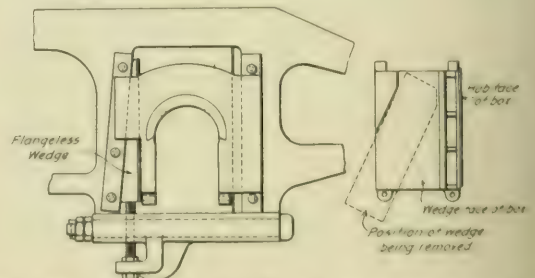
Driving Box Used with Flangeless Shoes and Wedges.
